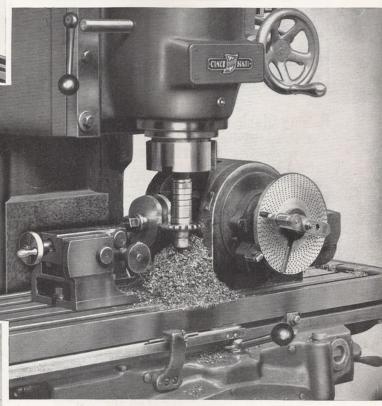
Milling a cam on a CINCINNATI No. 3 Vertical Dial Type Milling Machine. Here is a true test of the indexing accuracy of the Dividing Head and the accuracy of the machine. Incidentally, this installation is equipped with Precision Measuring Equipment.
